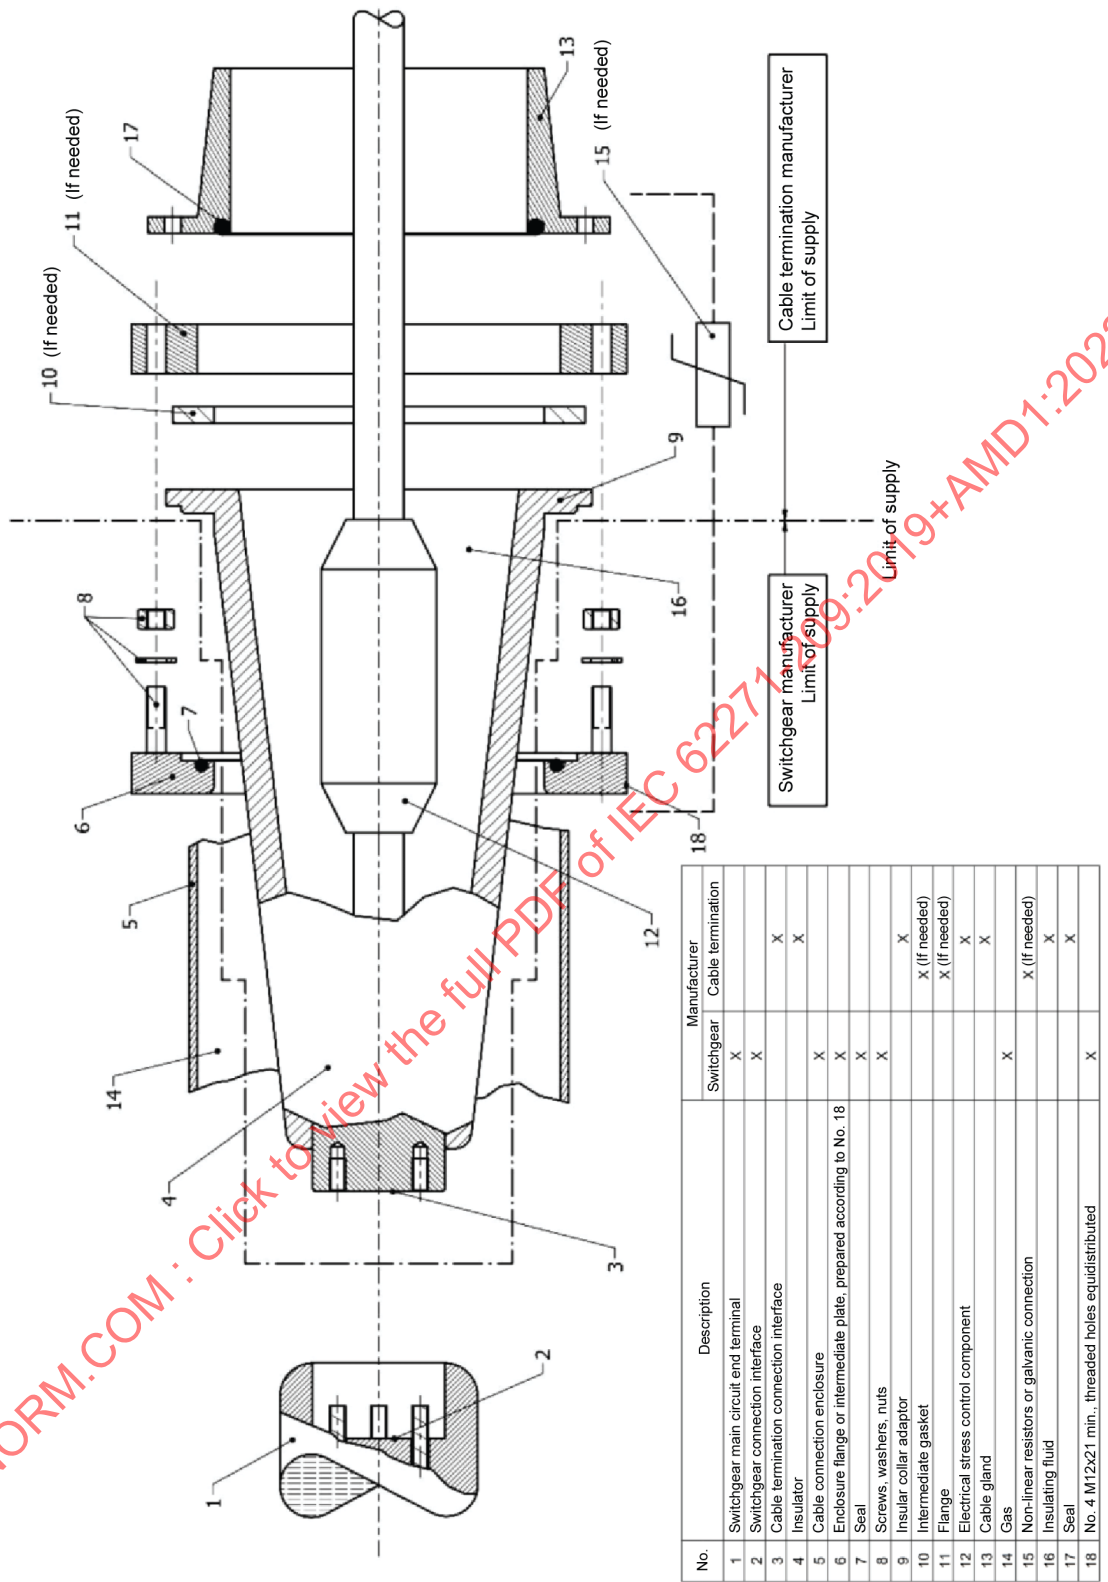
Fluid-filled cable connection assembly – Typical arrangement
